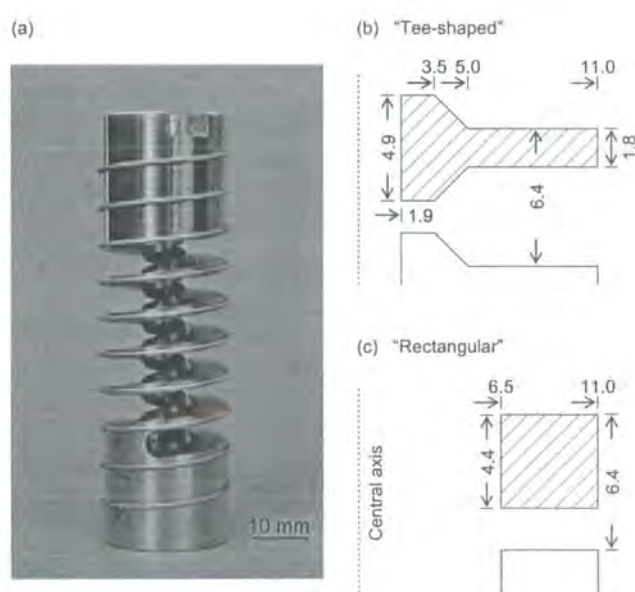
(a) Photograph of a superconducting wire mounted on a tee-shaped spring; (b) and (c) sections through turns of the tee-shaped and rectangular springs showing radial and axial dimensions in mm.
